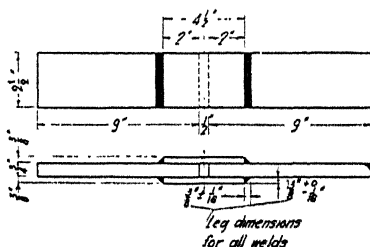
Transverse fillet-weld shearing specimen L-1.
